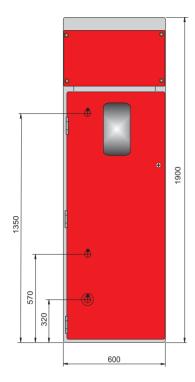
Front view of 12 kV cable panel with switch-disconnector H 22 EA/EK and disconnecting switch
